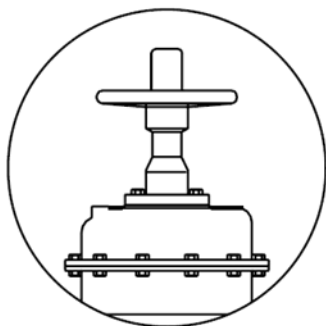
Top Mounted Manual Handwheel Unit (T-1 ~ T-3)
